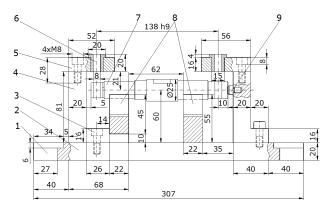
The scheme of the fixturing: 1 – fixing hangers; 2 – rectangular base plate; 3 - screw M8x1; 4 – corner support;
